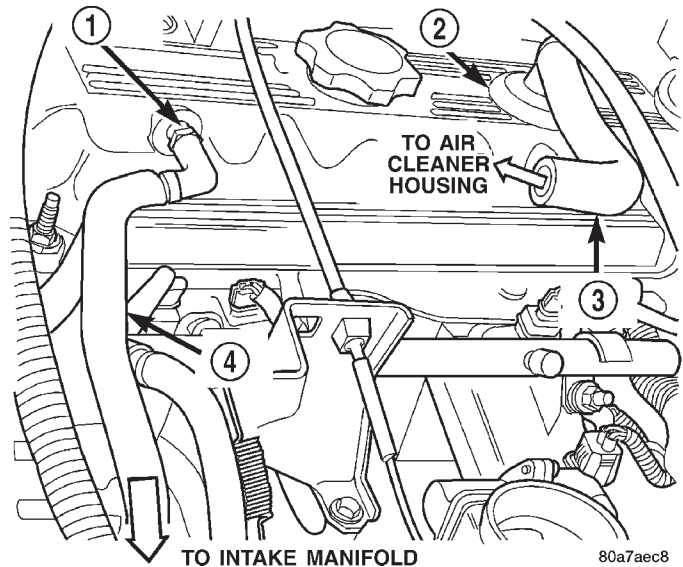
Install Orifice Tool 2.5L 4-Cylinder Engine
